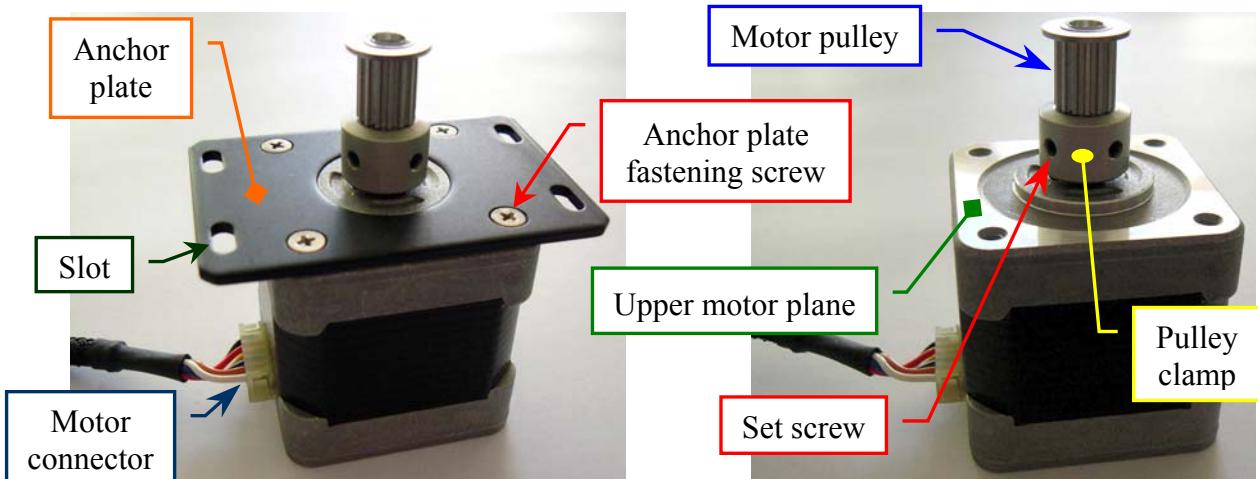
Horizontal Mov. Arm Motor anchor plate
